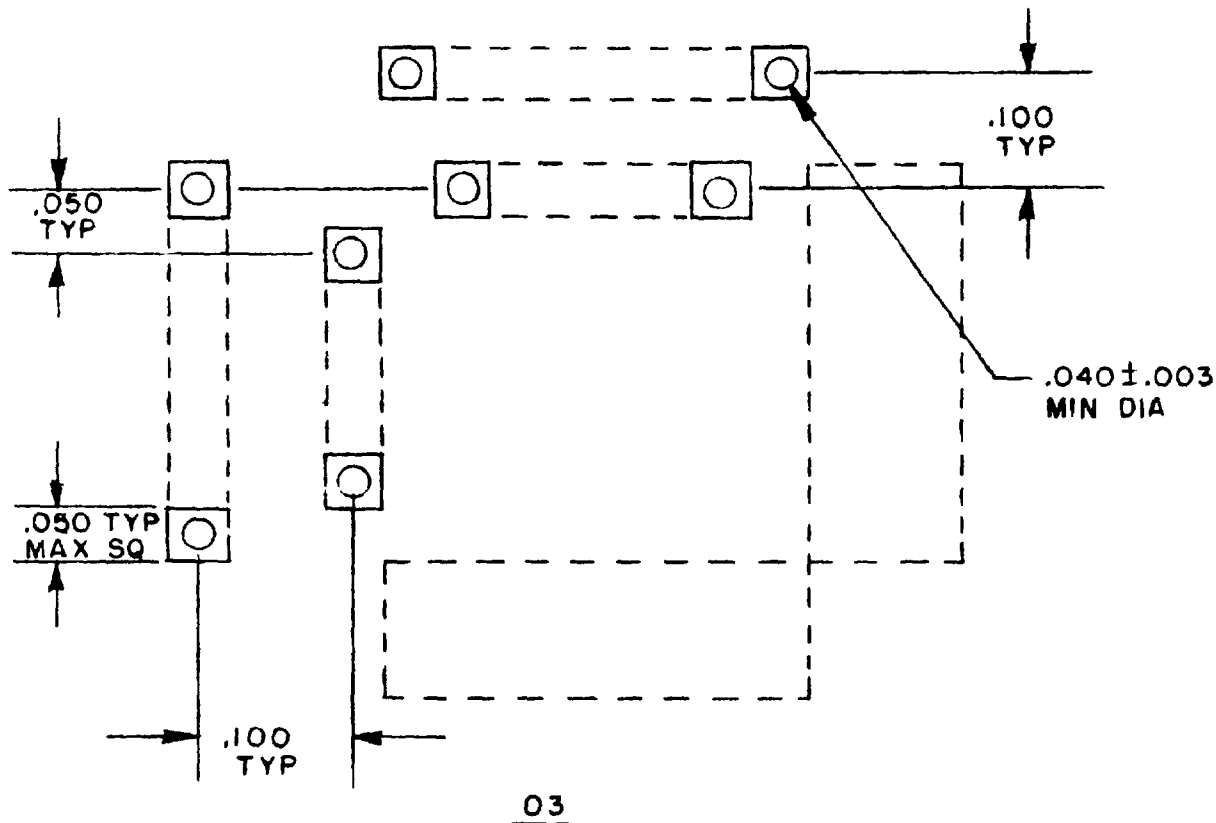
P.W.B. patterns (footprint) component side shown.
